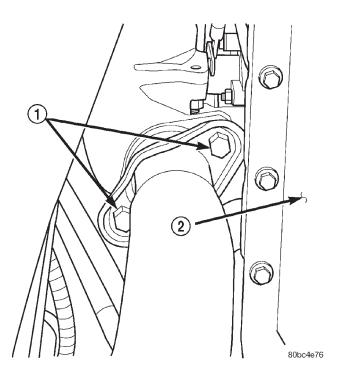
Exhaust System Inlet Pipe Retaining Bolts 1 – EXHAUST SYSTEM INLET PIPE RETAINING BOLTS 2 – ENGINE OIL PAN
